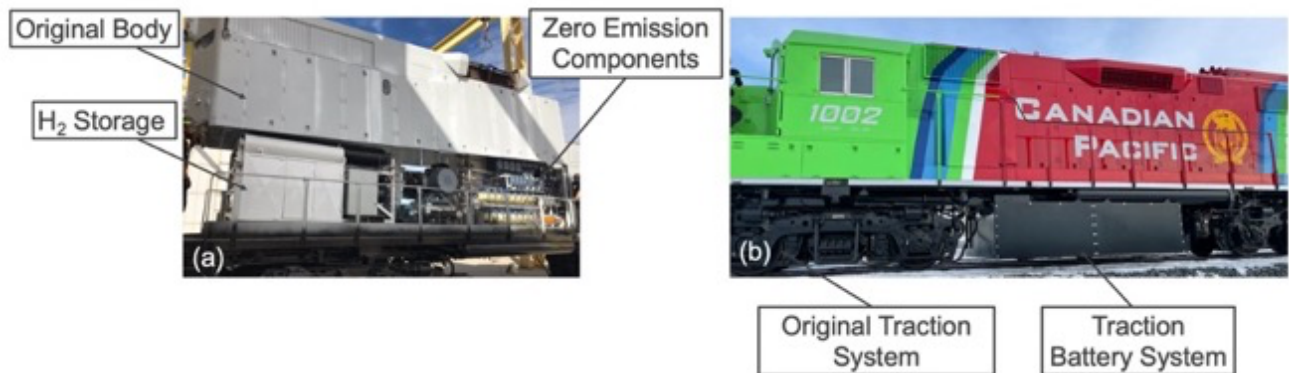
(a) Pre-made zero emission component assemblies installed on the locomotive platform as "skids" with the original locomotive body being installed over top and the completed locomotive platform (b) once final assembly has been completed.
